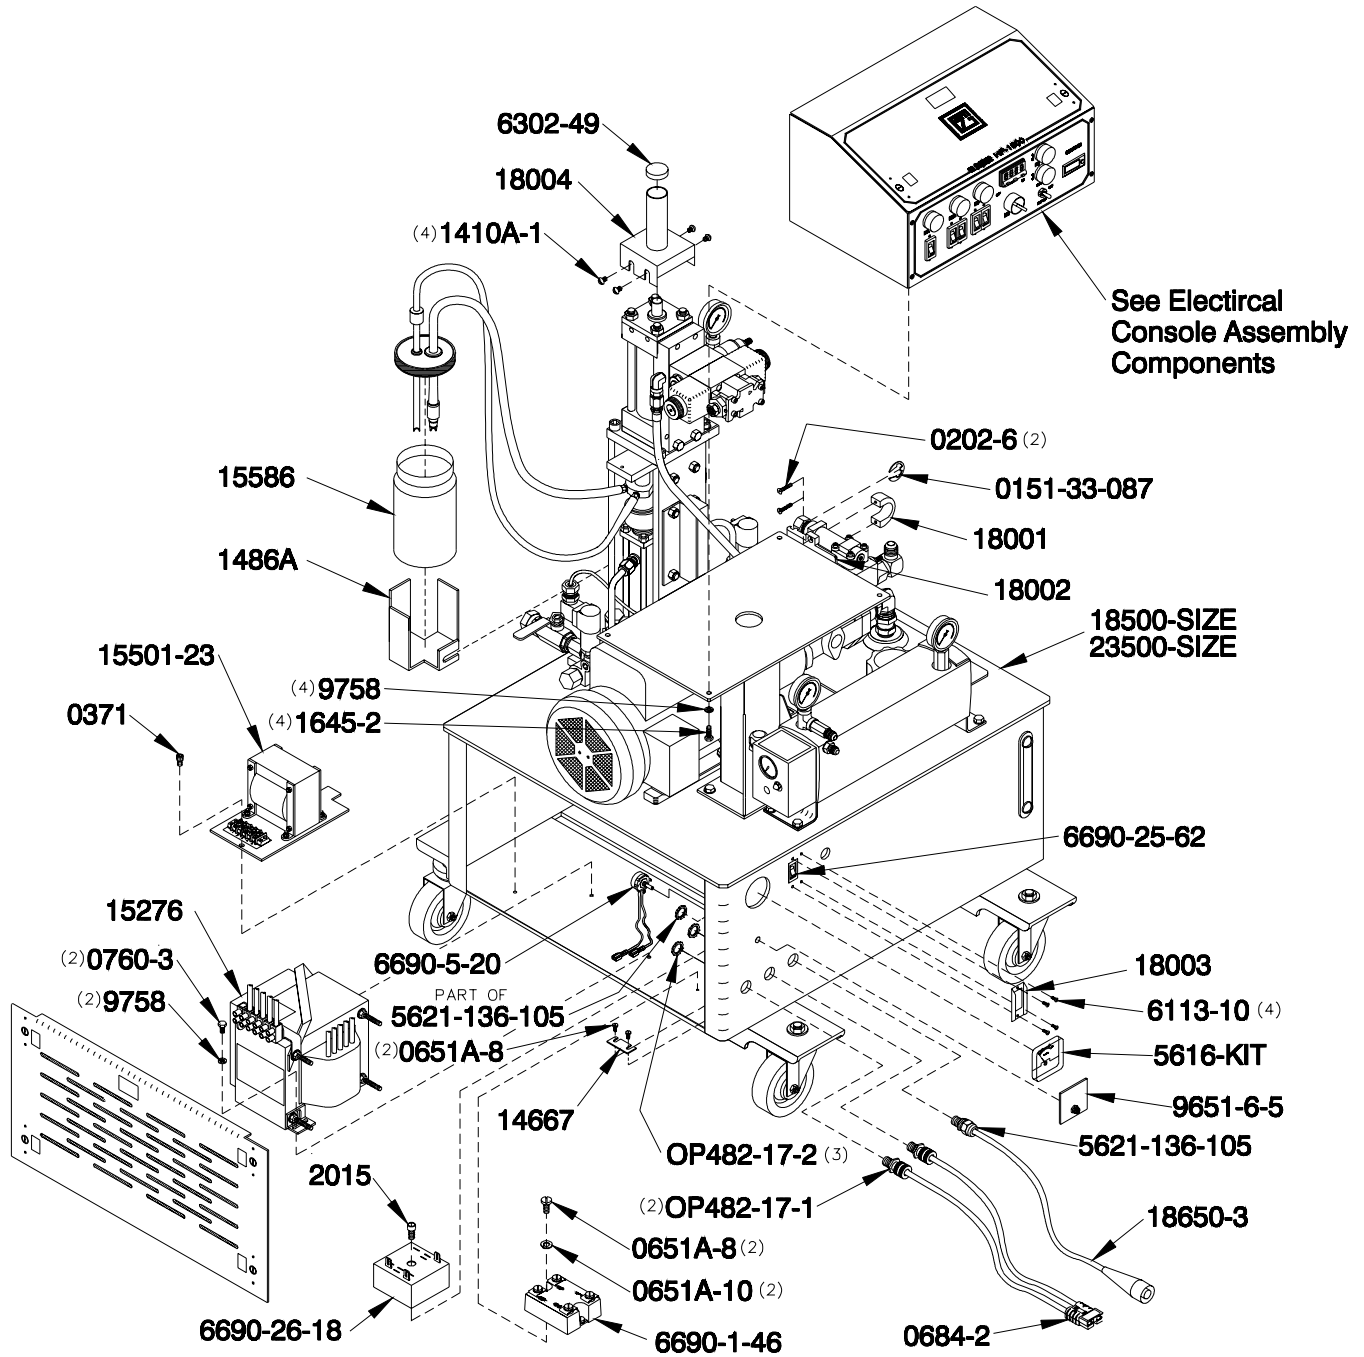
Final Assembly, (Part No. 18000-SIZE/18000-DGT-SIZE/23000-SIZE), Exploded View
